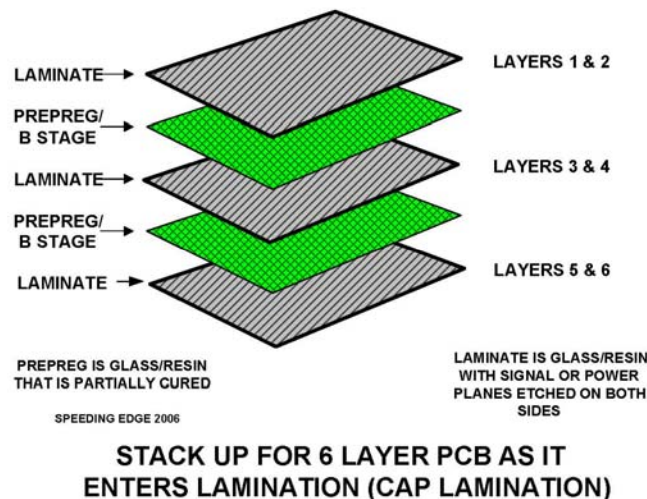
Typical Six-Layer PCB Using Cap Lamination
